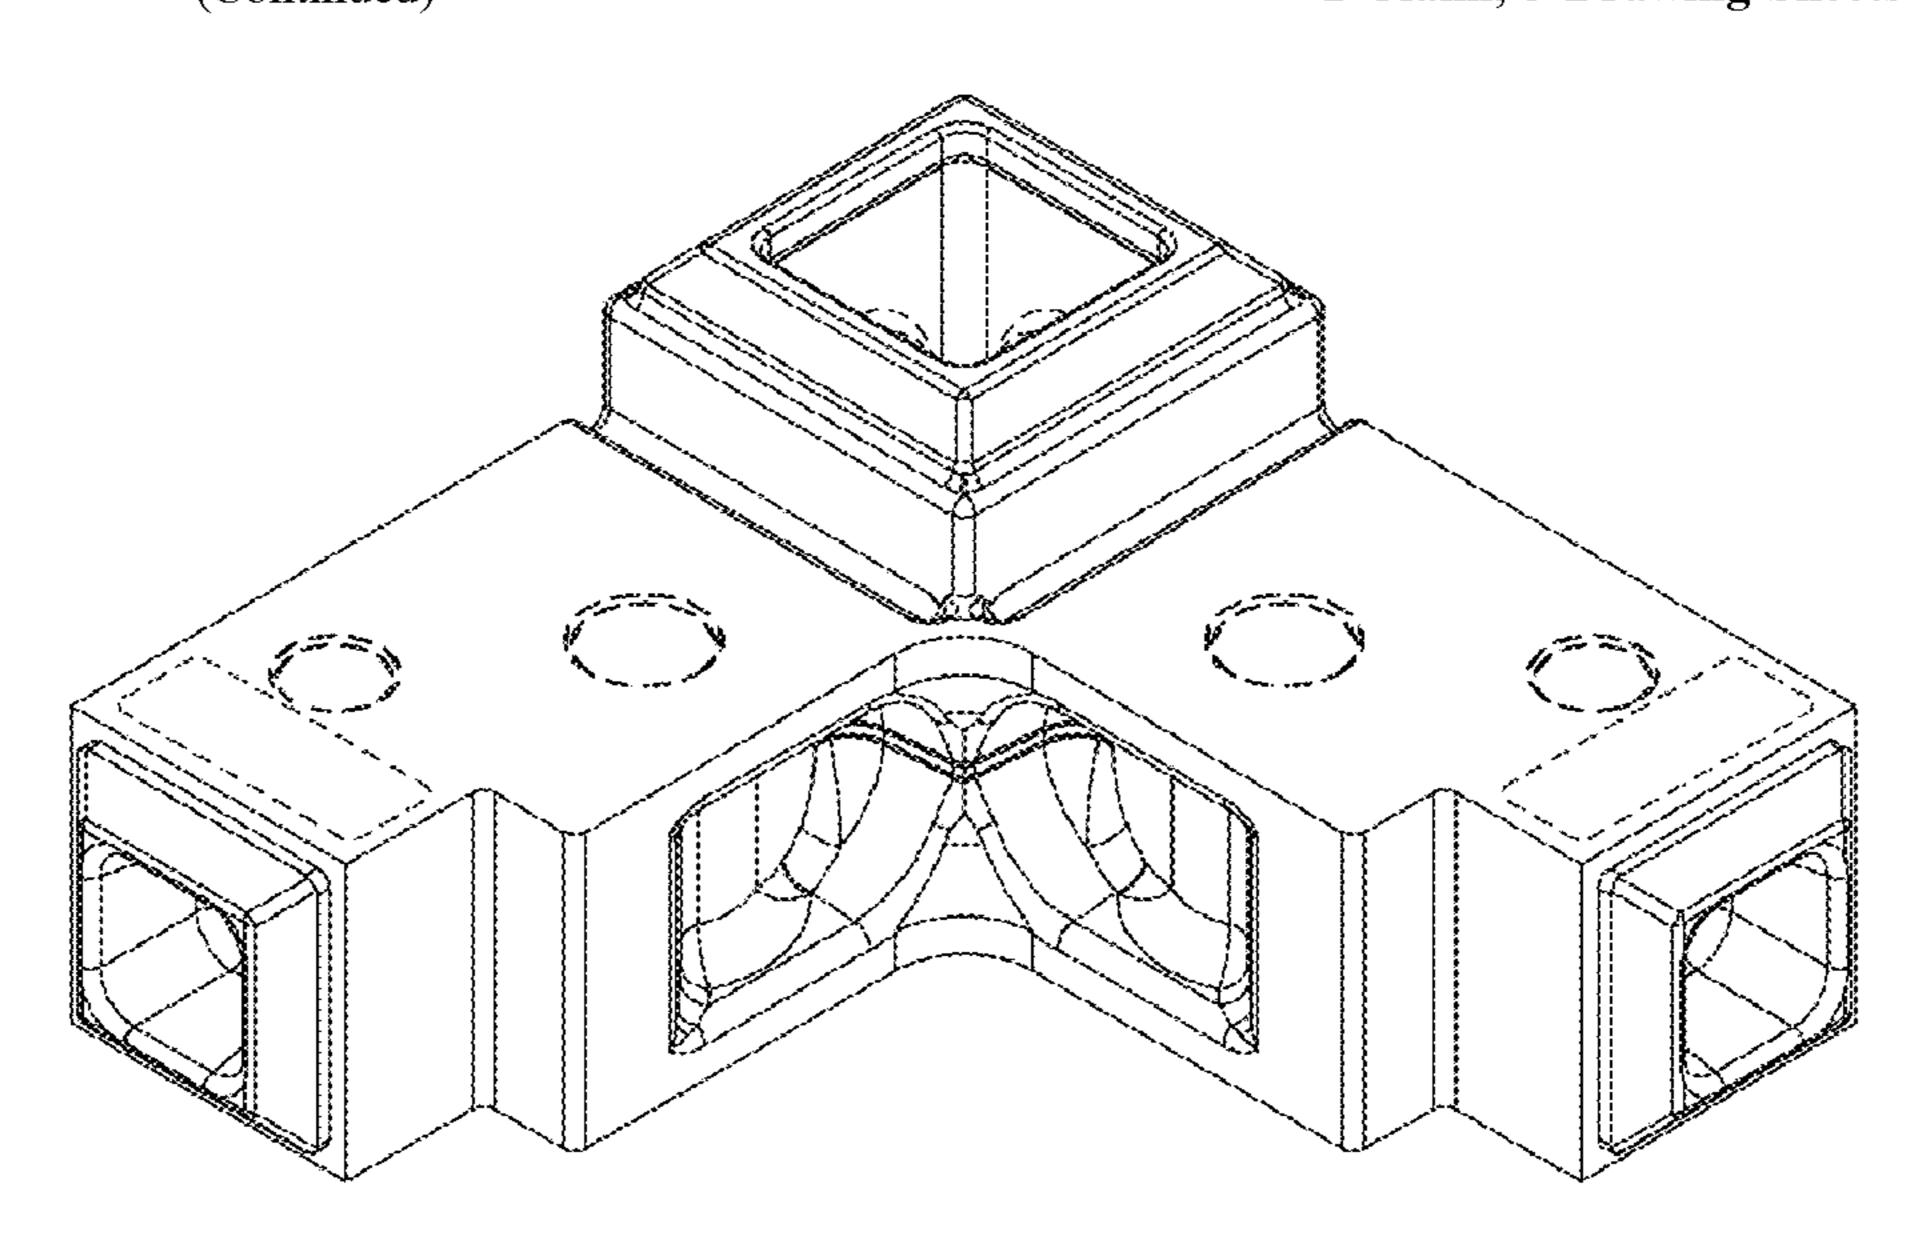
is a back side view of the structural modular building connector of FIG. 1;
